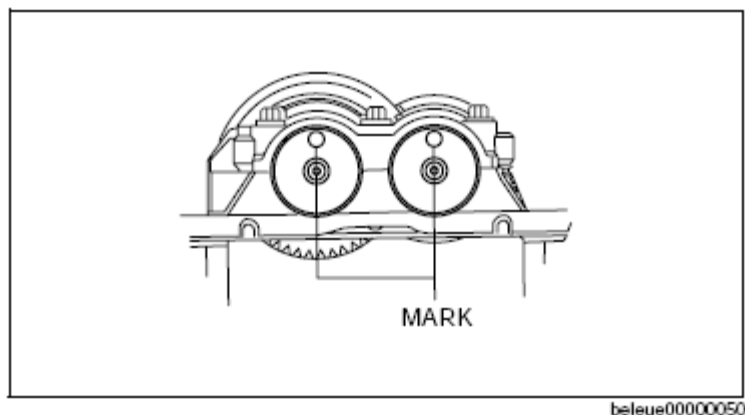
Identifying Balancer Unit Marks At Exact Top Center Positions
